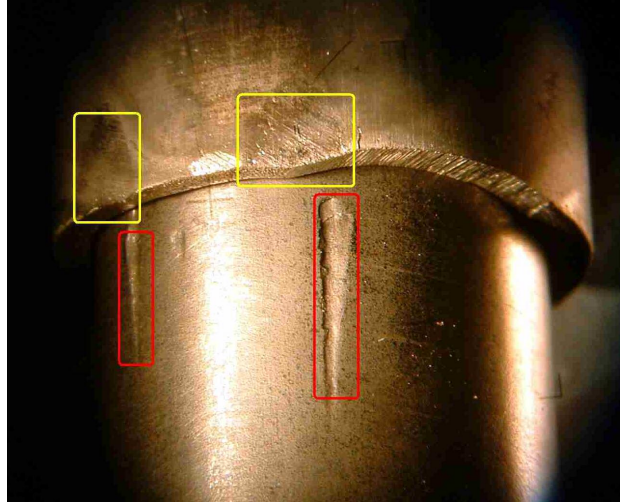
Hardide-coated Inconel pin and Monel bush survived intense repeated hammer impacts without fracture or flaking
